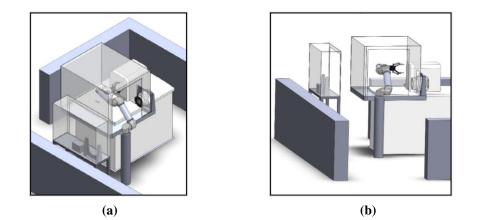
Enclosure Concept 2 - Partial Enclosure (a) Top View (b) Side View
